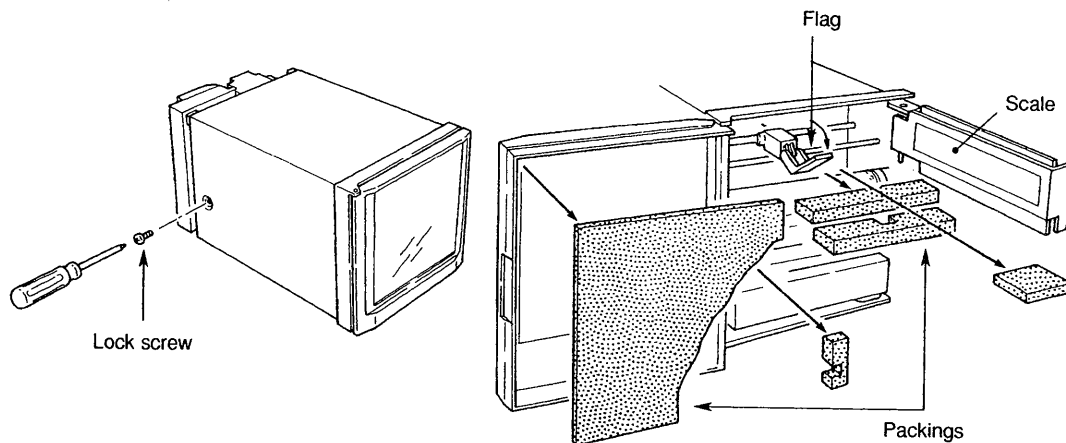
Removing Lock Screw and Packings for Transit (Dot-Printing Model)
